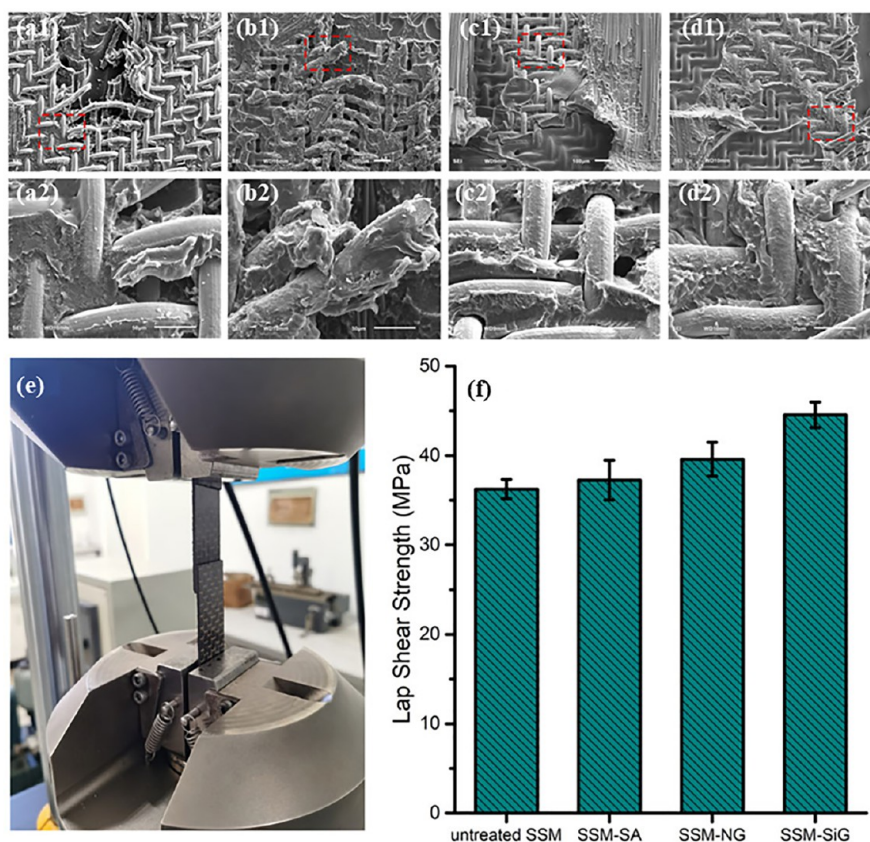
Fracture surfaces of welded joints after lap shear tests for (a1), (a2) untreated SSM; (b1), (b2) SSM-SA; (c1), (c2) SSM-NG, and (d1), (d2) SSM-SiG; (e) LSS testing; (f) LSS of untreated SSM, SSM-SA, SSM-NG, and SSM-SiG welded joints, image courtesy of Li.²⁶
